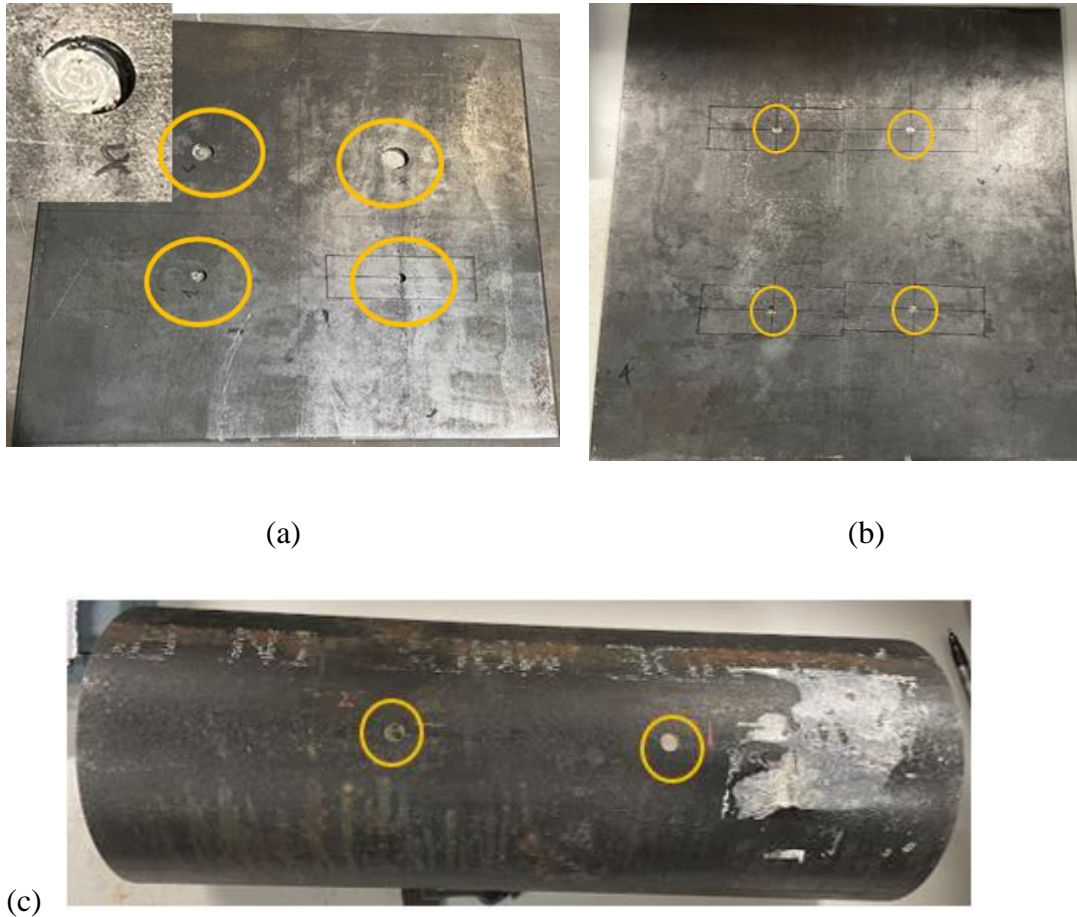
Machined cylindrical defects on test specimens. (a) Plate with varying defect widths, (b) Plate with varying defect depths, and (c) Pipe with varying defect depths.
